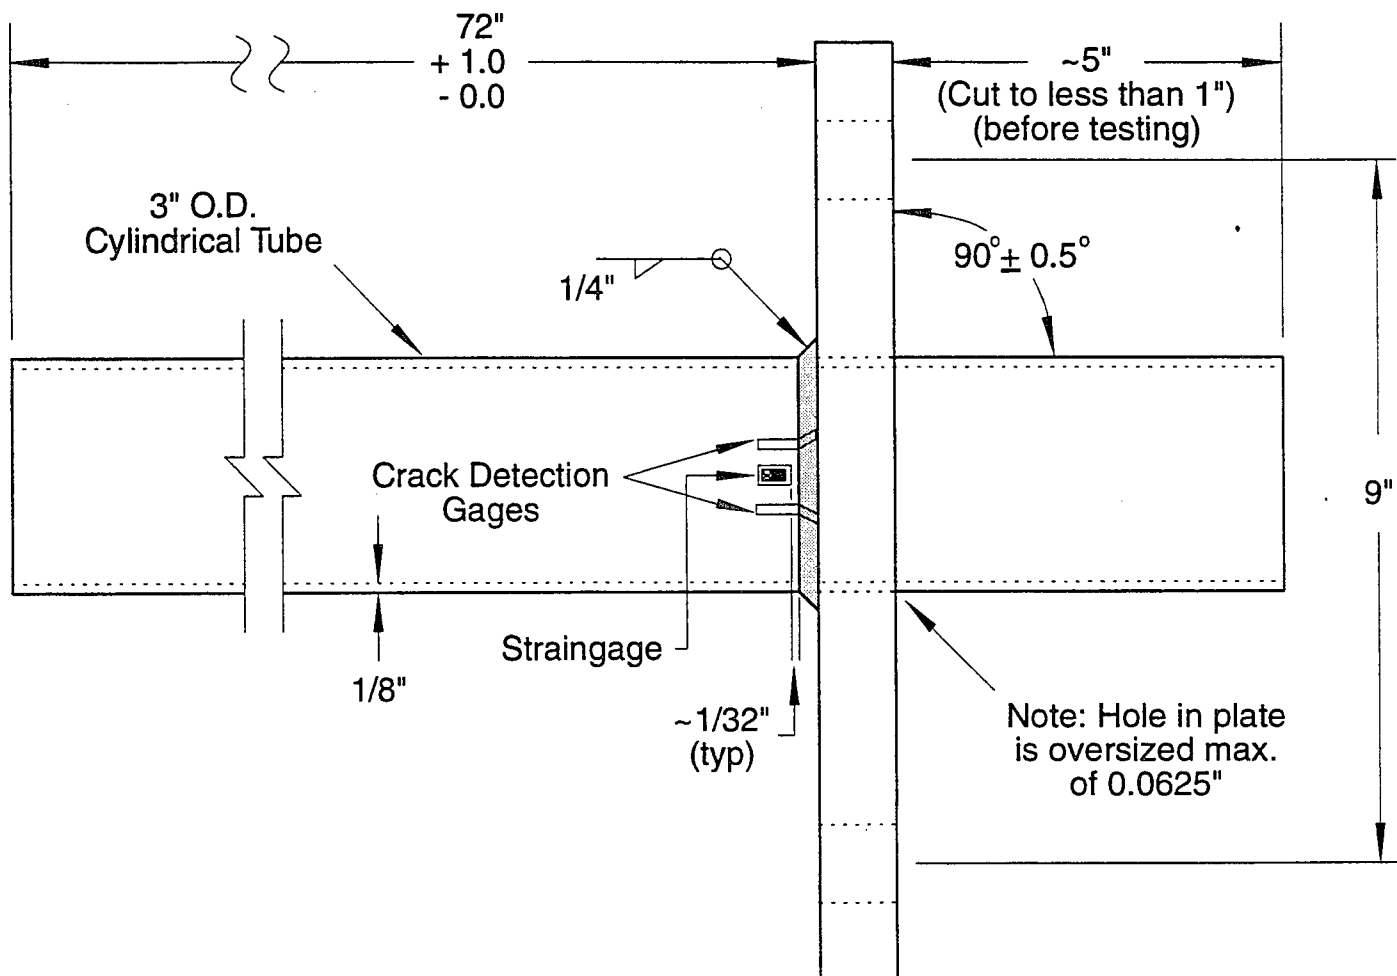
Drawing of test specimen showing pertinent dimensions. View is from above. Drawing is not to scale.
